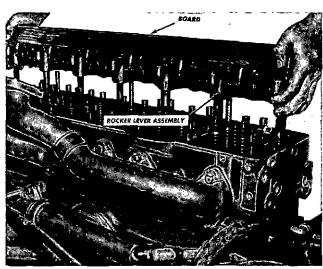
Removing rocker lever assembly $-C \stackrel{\$712080}{\cup} J$
